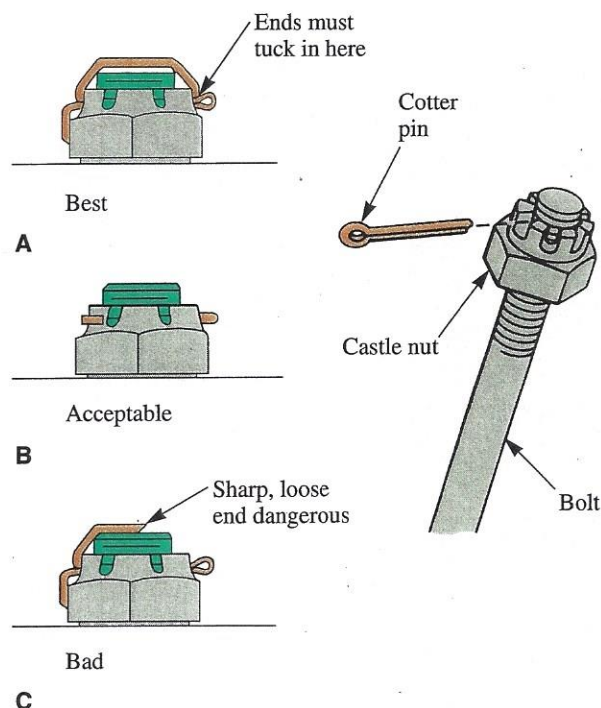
Cotter pin is placed through castle nut and bolt hole to prevent nut from coming off bolt. Installation method A or B is acceptable. Method A is more difficult to produce, but eliminates sharp ends.
